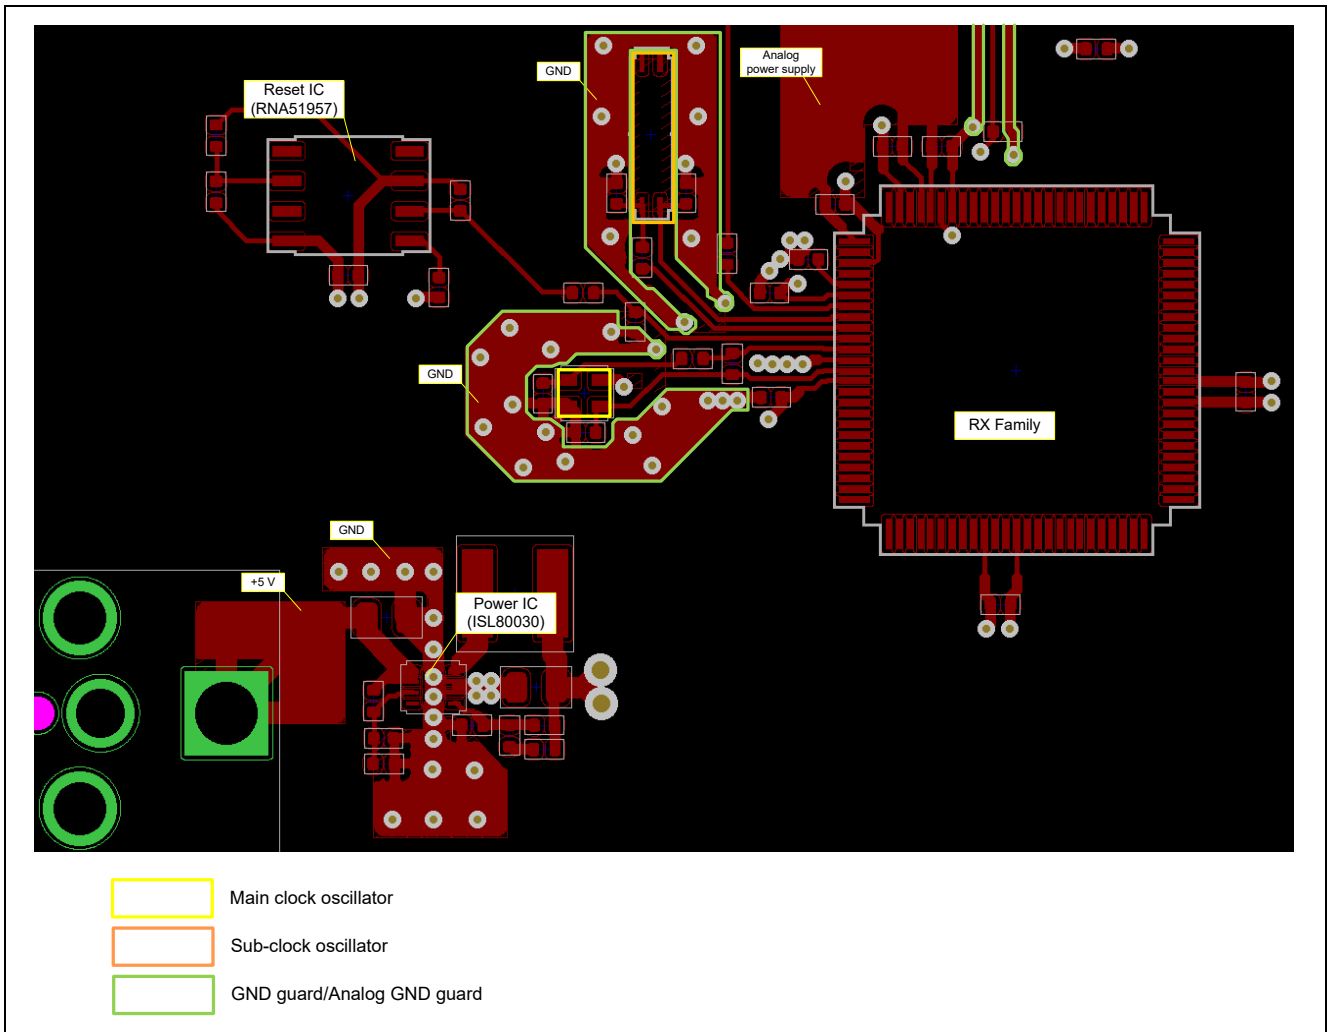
Example Board Wiring Pattern (First Layer Wiring Pattern)
